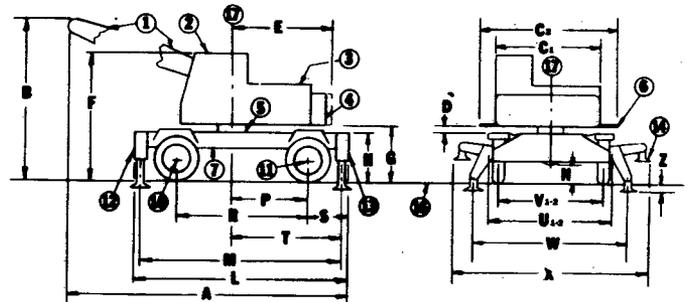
WHEEL MOUNTED, SINGLE OPERATOR STATION
